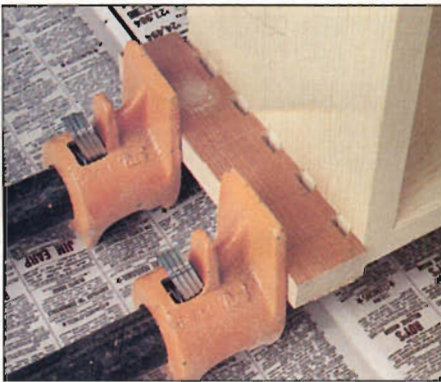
Photo J: When assembling the sides to the top/bottom, use clamp blocks that straddle the slightly protruding dovetail pins.
